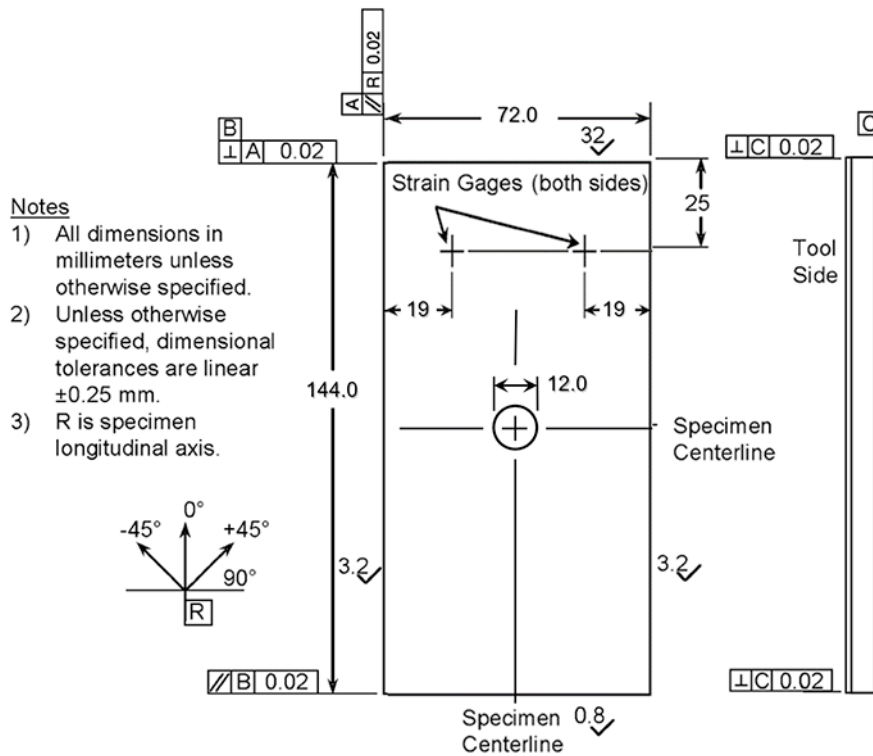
Open-Hole Compressive Specimen (SI Version)
